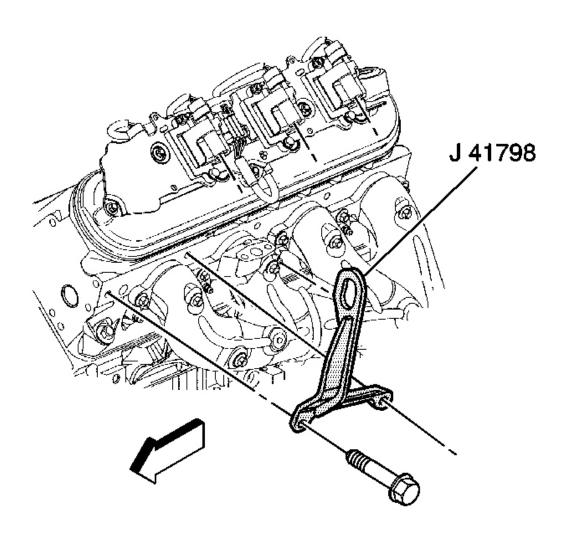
View Of J 41798 Courtesy of GENERAL MOTORS CORP.
